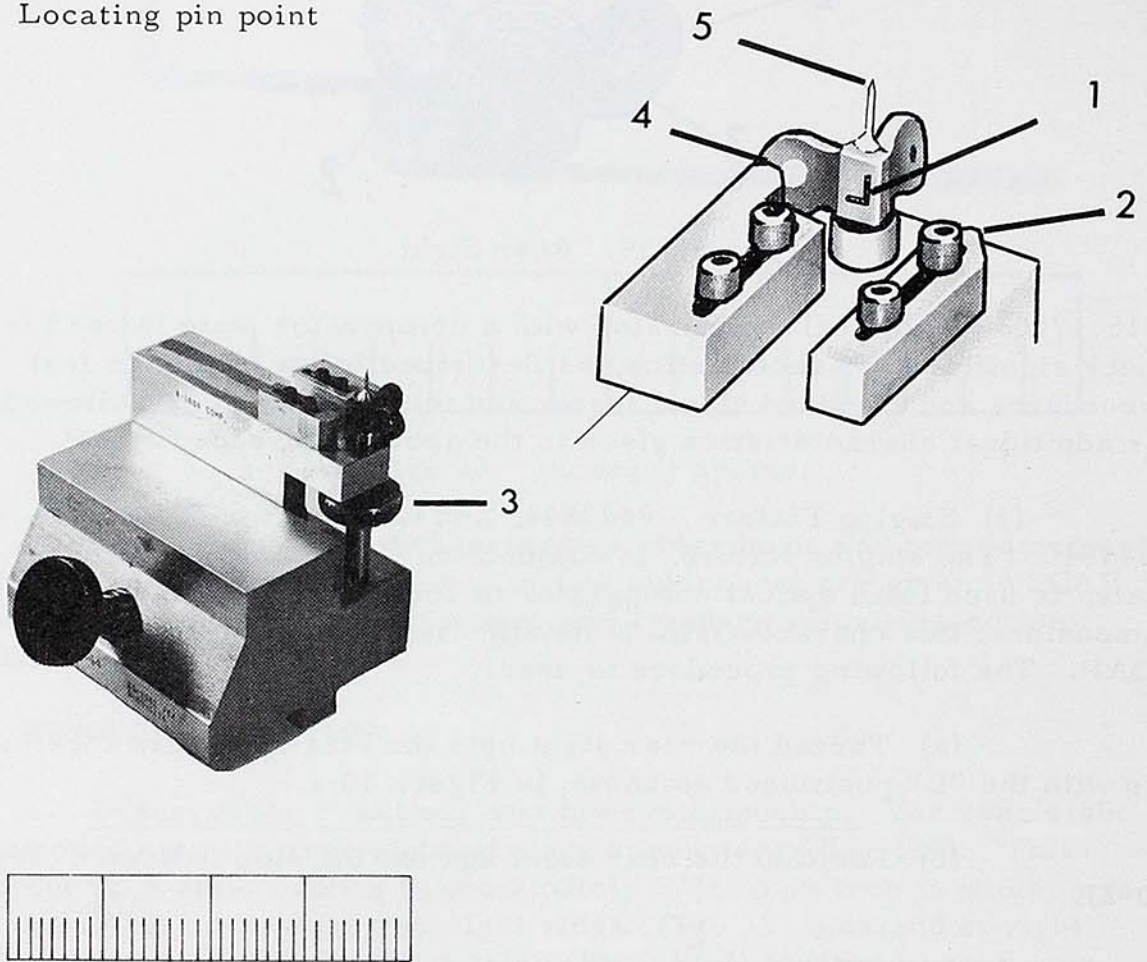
Initial Position of Rear Sight on Staging Fixture.
